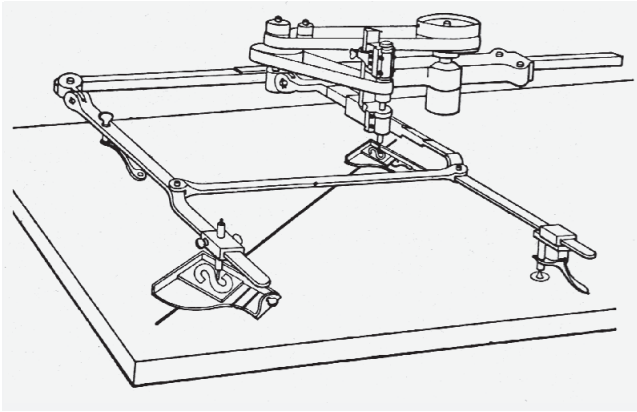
Technical drawing of a 1880s pantographic device. Reproduced from Kelly 1977, p. 53.
